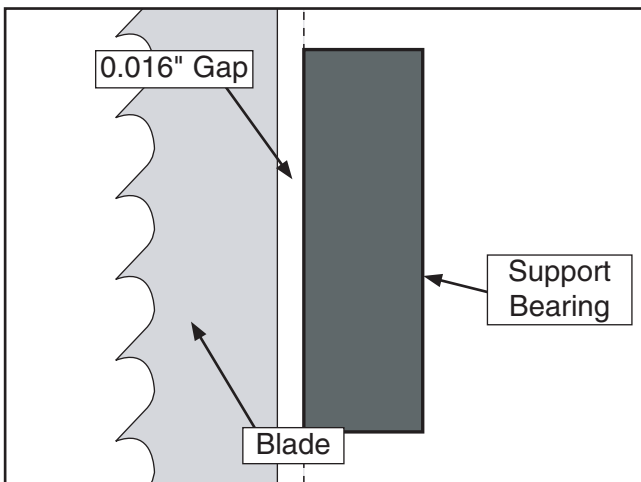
Blade should be aligned approximately 0.016" away from the bearing edge.
